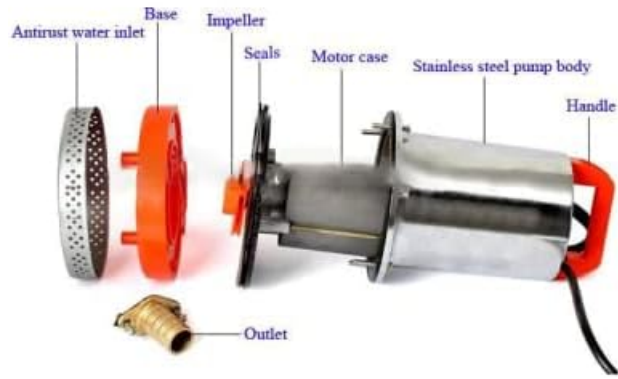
Exploded view showing internal components like the motor case, impeller, seals, and base.
